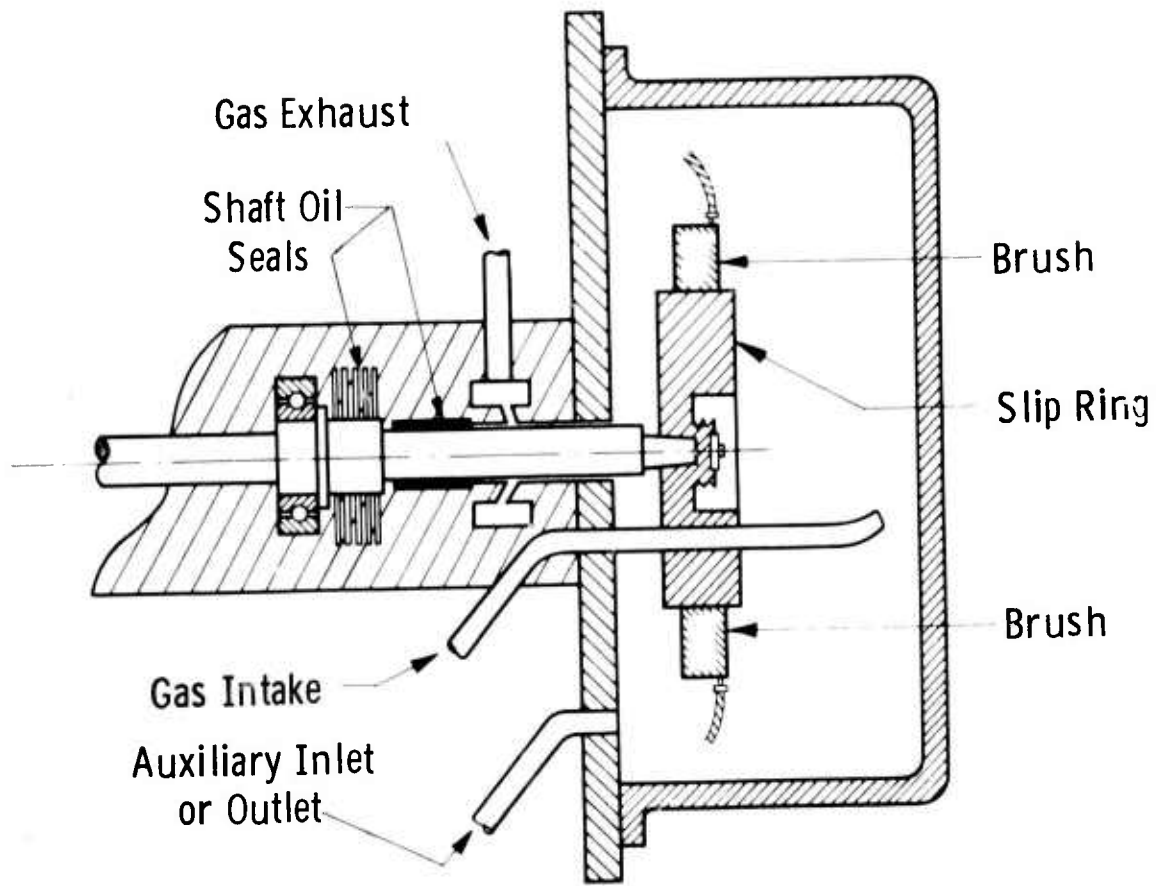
Test Chamber of Type B1 Brush Tester
